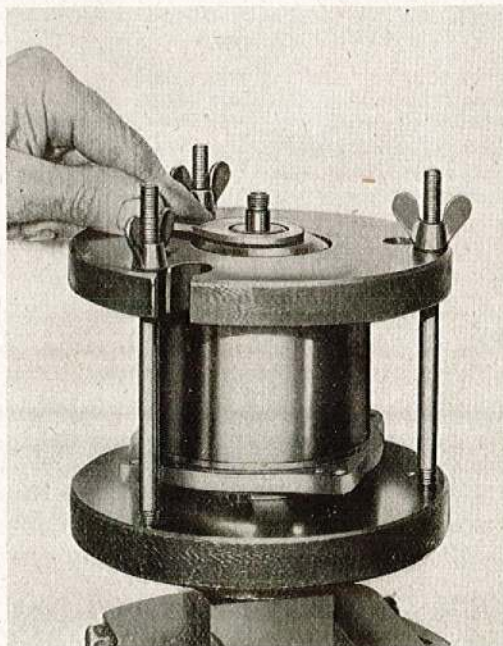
Removing spring carrier nut with rotor assembly mounted in jig
